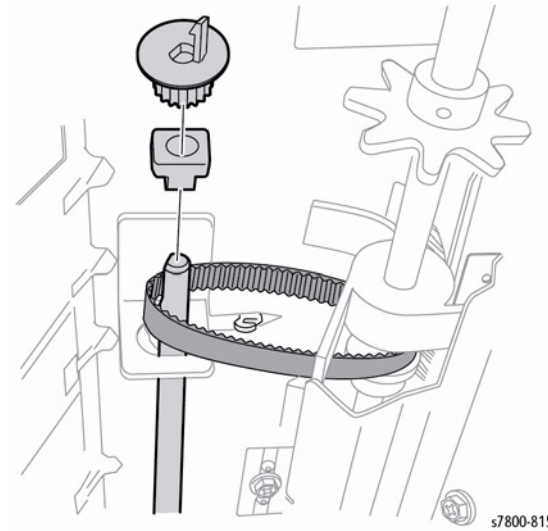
Removing the Paddle Shaft Drive Belt and Paddle Shaft Bearing
